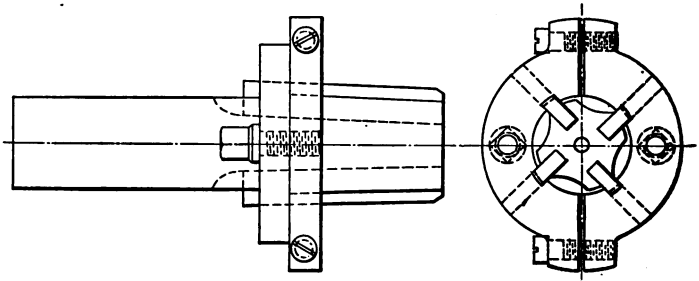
Burritt's Design of Inserted Blade Pipe Tap
